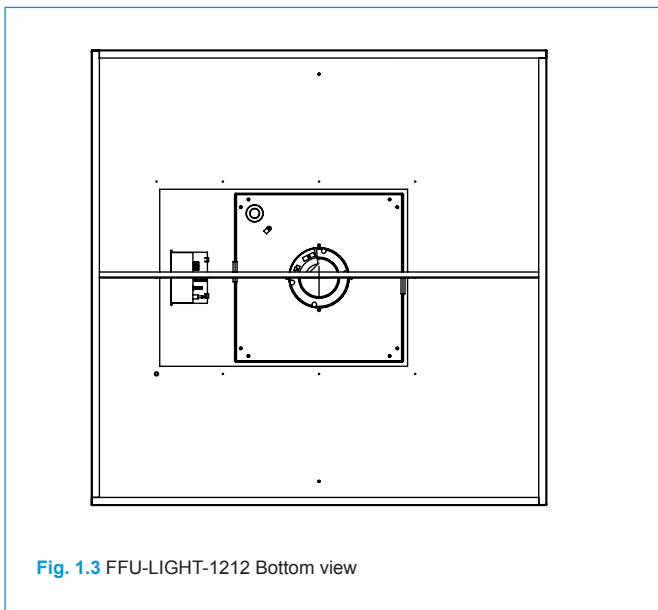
FFU-LIGHT-1212 Bottom view
